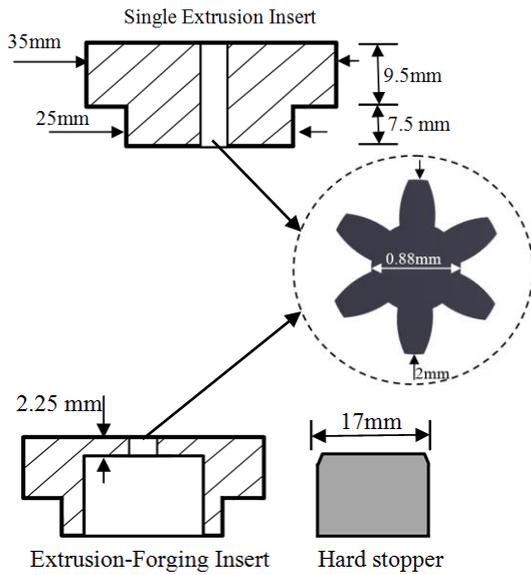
Inserts a) Single extrusion b) Combined Extrusion-Forging
